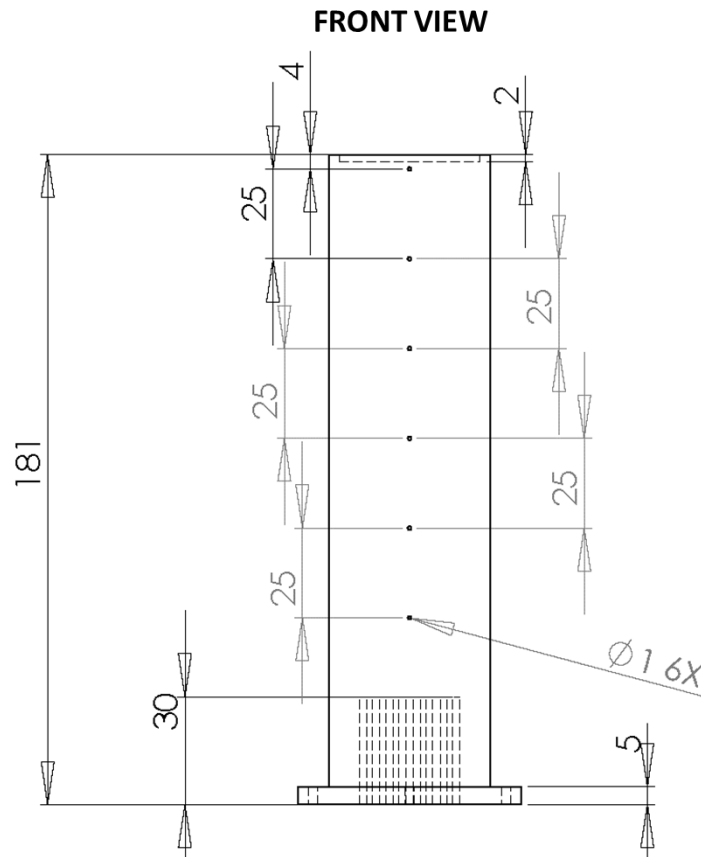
Cross sectional view of the copper block. All dimensions shown are in mm.
